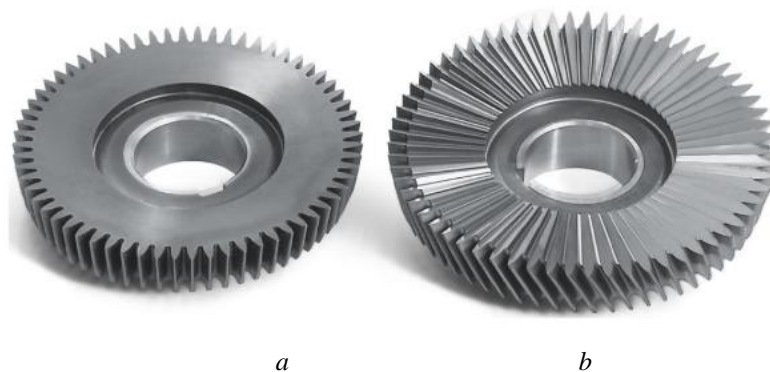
Solid spur cutters with positive rake for helical gears (a) and universal helical cutter with oblique face (b)
